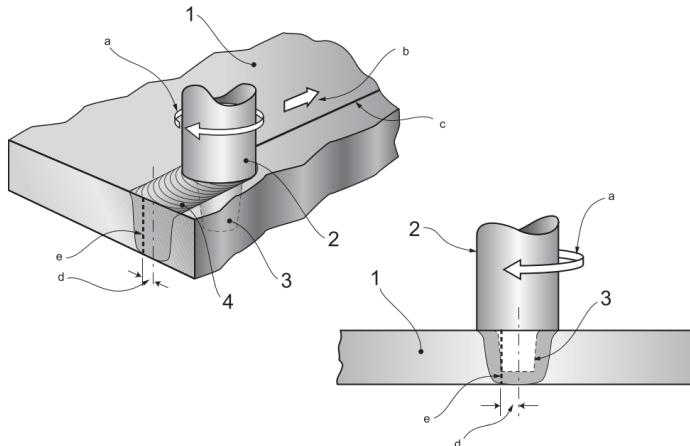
Lateral offset showing the centreline of the tool not centred on the joint. 1-Workpiece; 2-Tool; 3-Probe; 4-Weld face; a-Direction of tool surface; b-Direction of source; c-Joint (faying surfaces); d-Lateral offset; e-Location of joint before welding [2-12].
